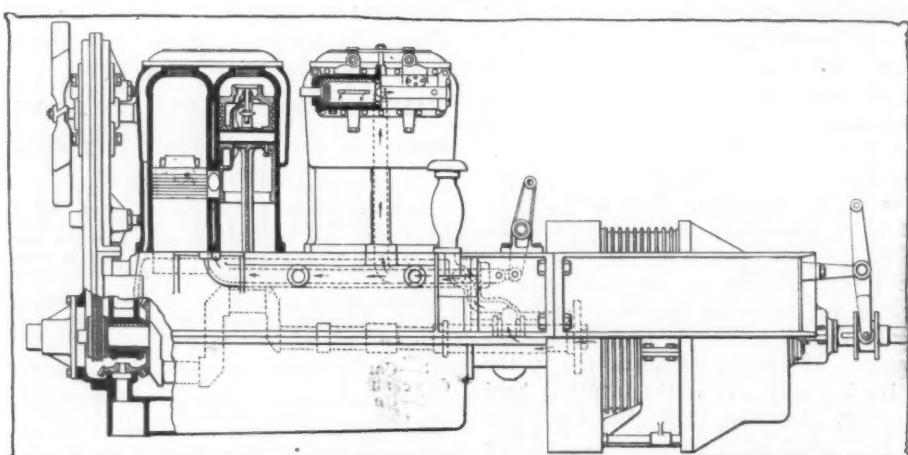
CONSTRUCTION OF CHURCH PNEUMATIC MOTOR
